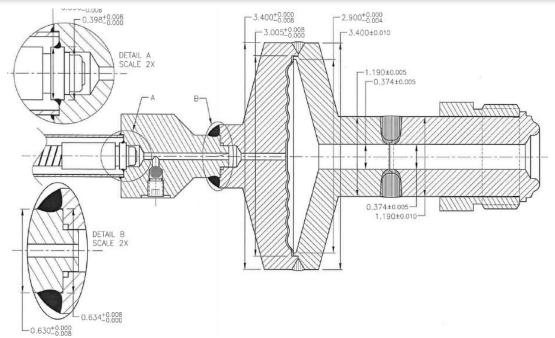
A drawing of the NaK-filled differential pressure transducer that is connected to the dump tank and expansion tank gas space using VCR fittings. The large diaphragm on this sensor should offer ΔP resolution ≈ 0.25 [in-H₂O] for more accurate sodium level determination (12).
